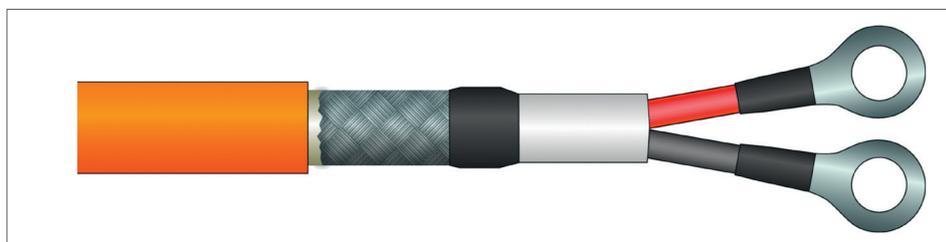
Step 8: Attaching and fixing the ring terminal
